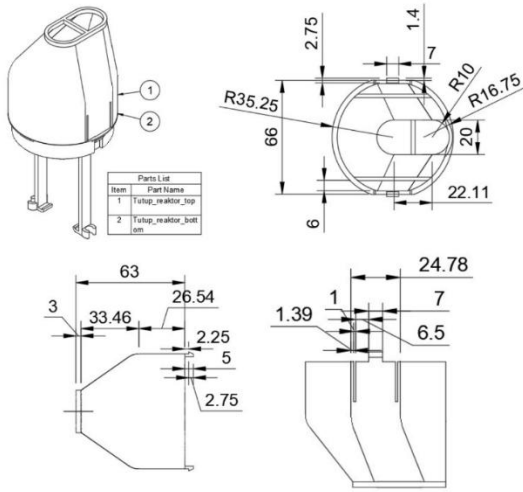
Assembled reactor core lid and the top piece of the split-shell design
